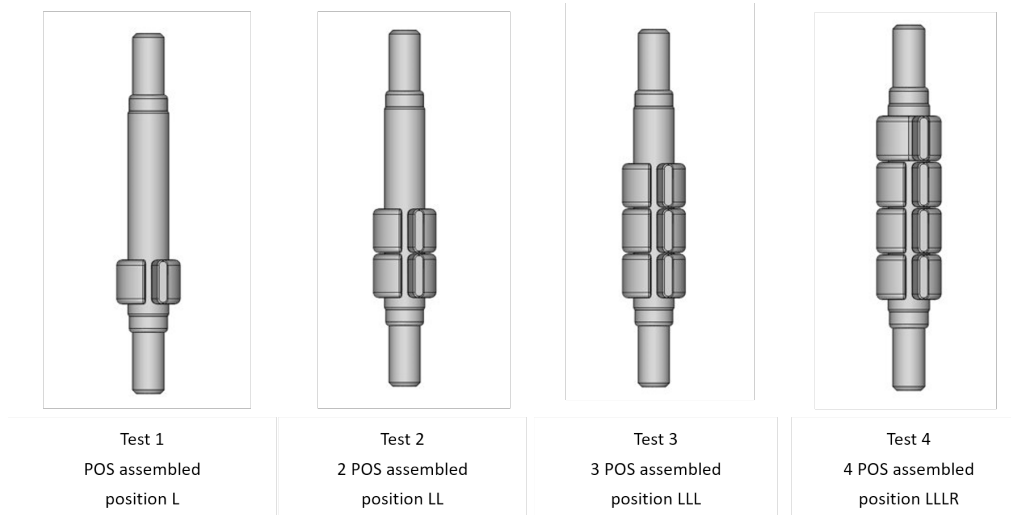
Assembly positions of POS. The test was performed to check how adding consecutive parts on shaft will influence the torque.
